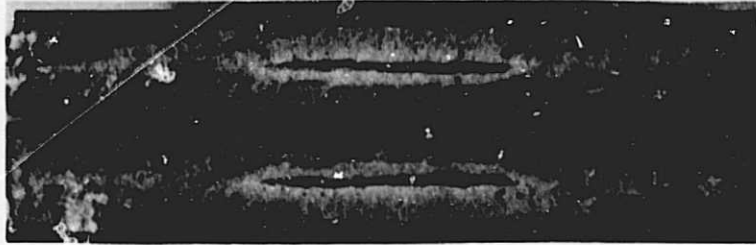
Radiograph and fracture surface macrograph of weld 2219-0.5-5B at IX.
